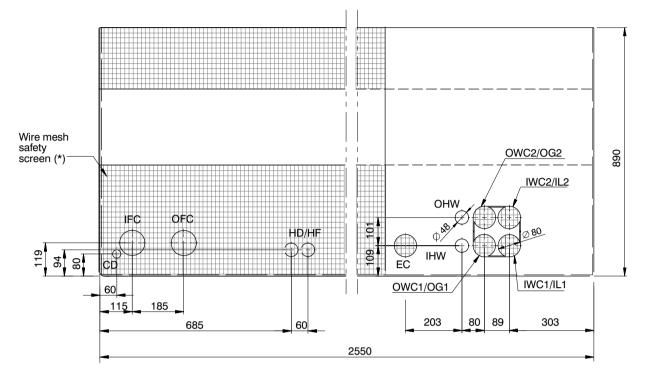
Refrigerant, water and electrical connections Liebert HPM D3F D4H...D7L doublecircuit – plan view
